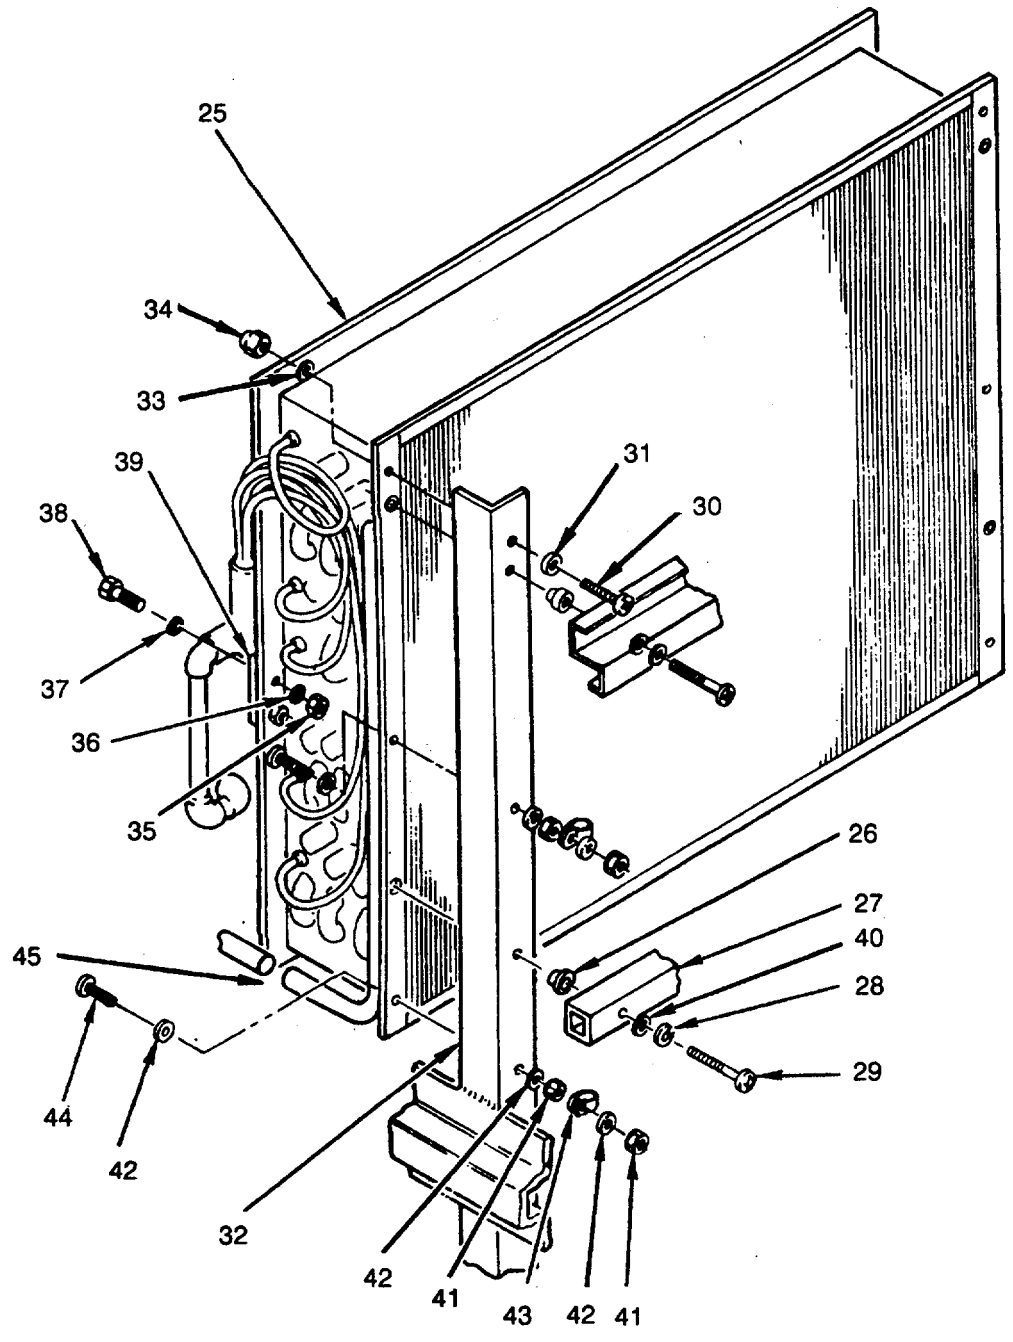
Evaporator Coil Removal (Sheet 2 of 2)
